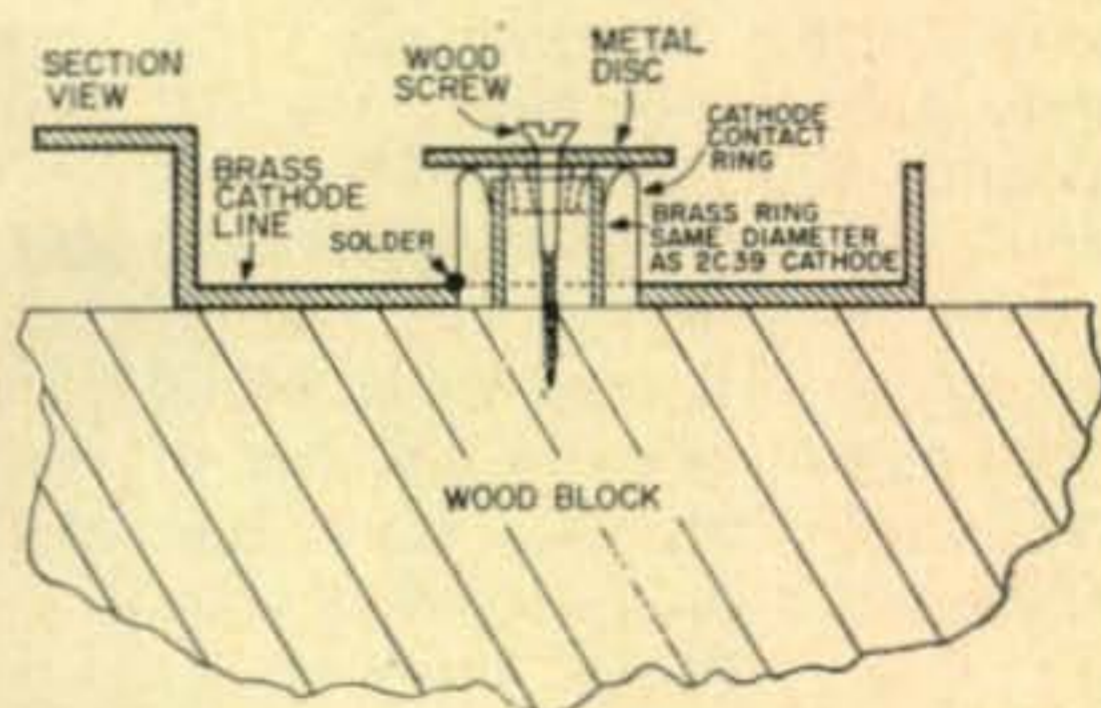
Specifications for construction of soldering jig for 2C39A contact rings.
